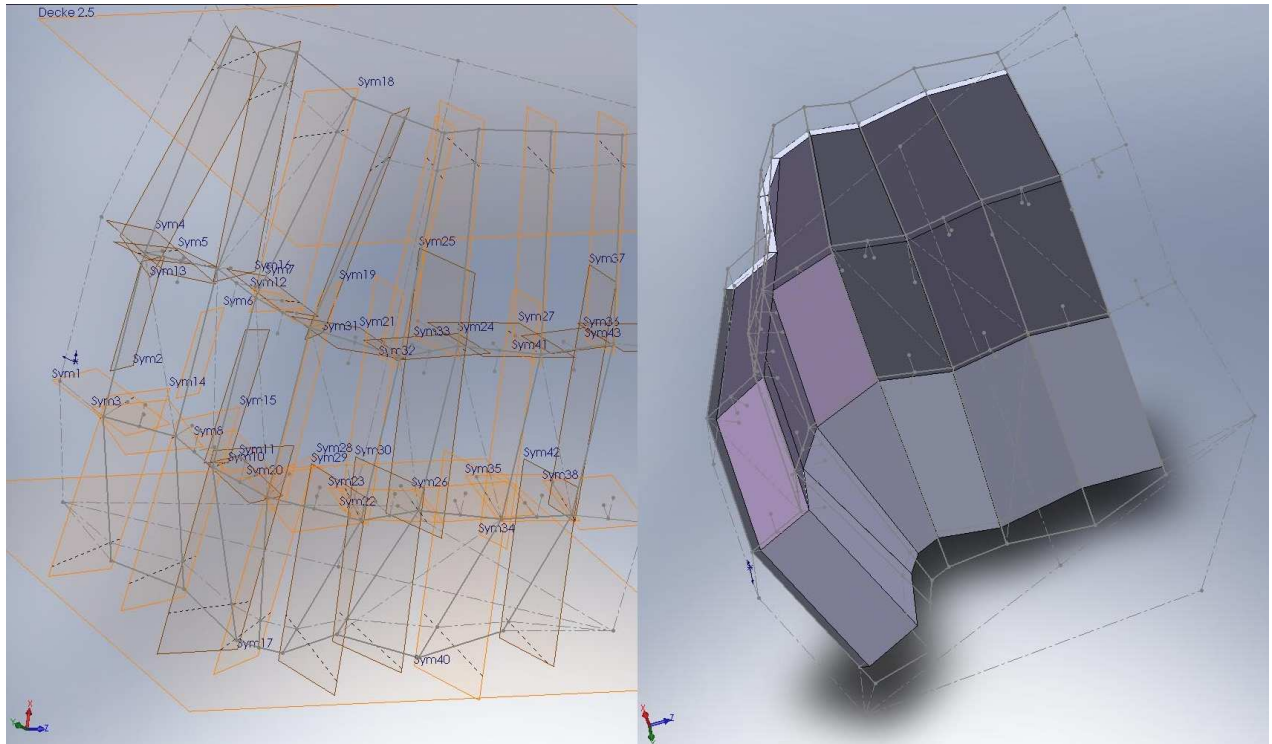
3D sketch (left) and the assembled panel parts (right)
